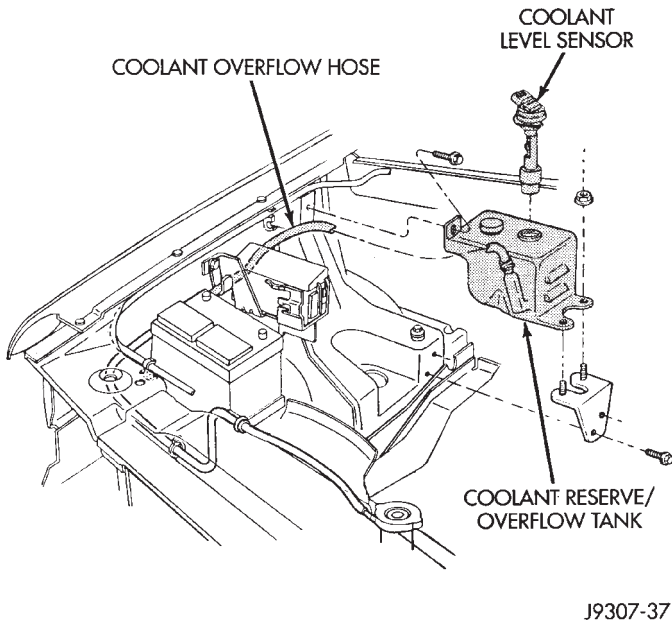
Coolant Reserve/Overflow Tank Mounting
